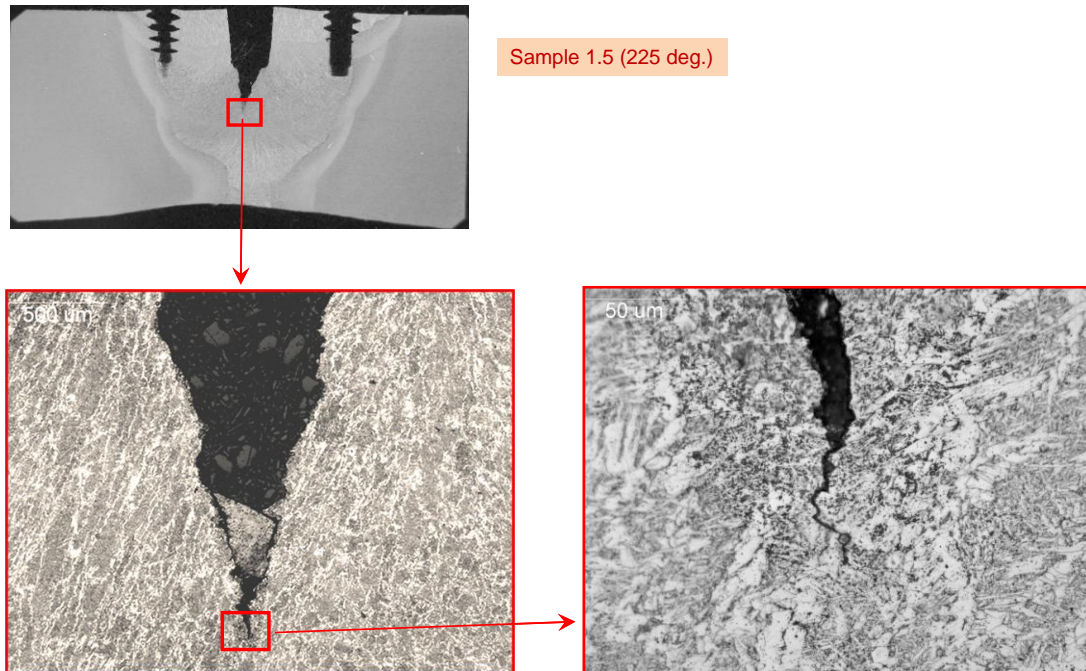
A cross-section of a weld flaw at different magnifications
